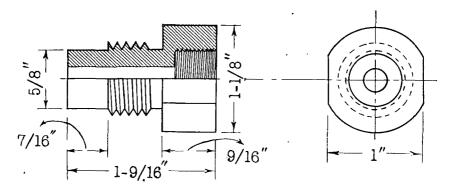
Adapter for fitting U. S. air-filling tube to Japanese recoil and counterrecoil mechanism.
